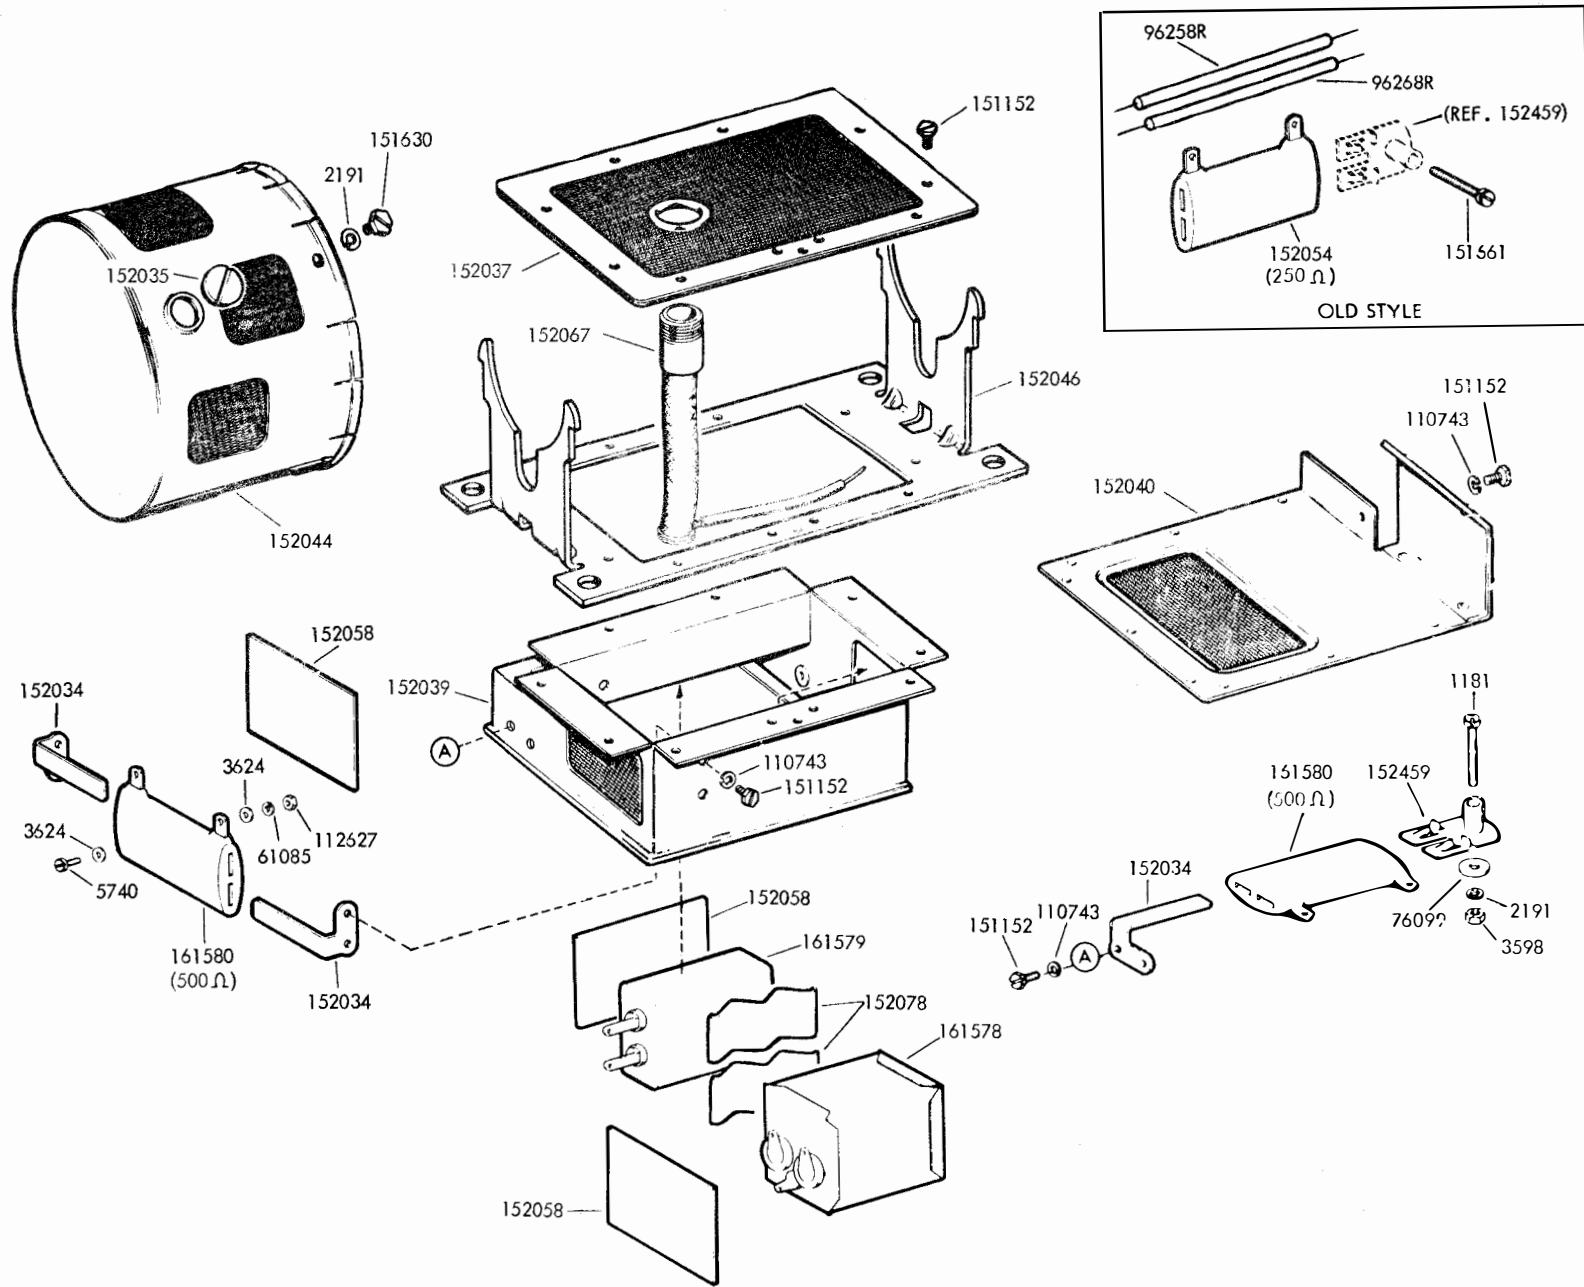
SERIES MOTOR MOUNTING PARTS
